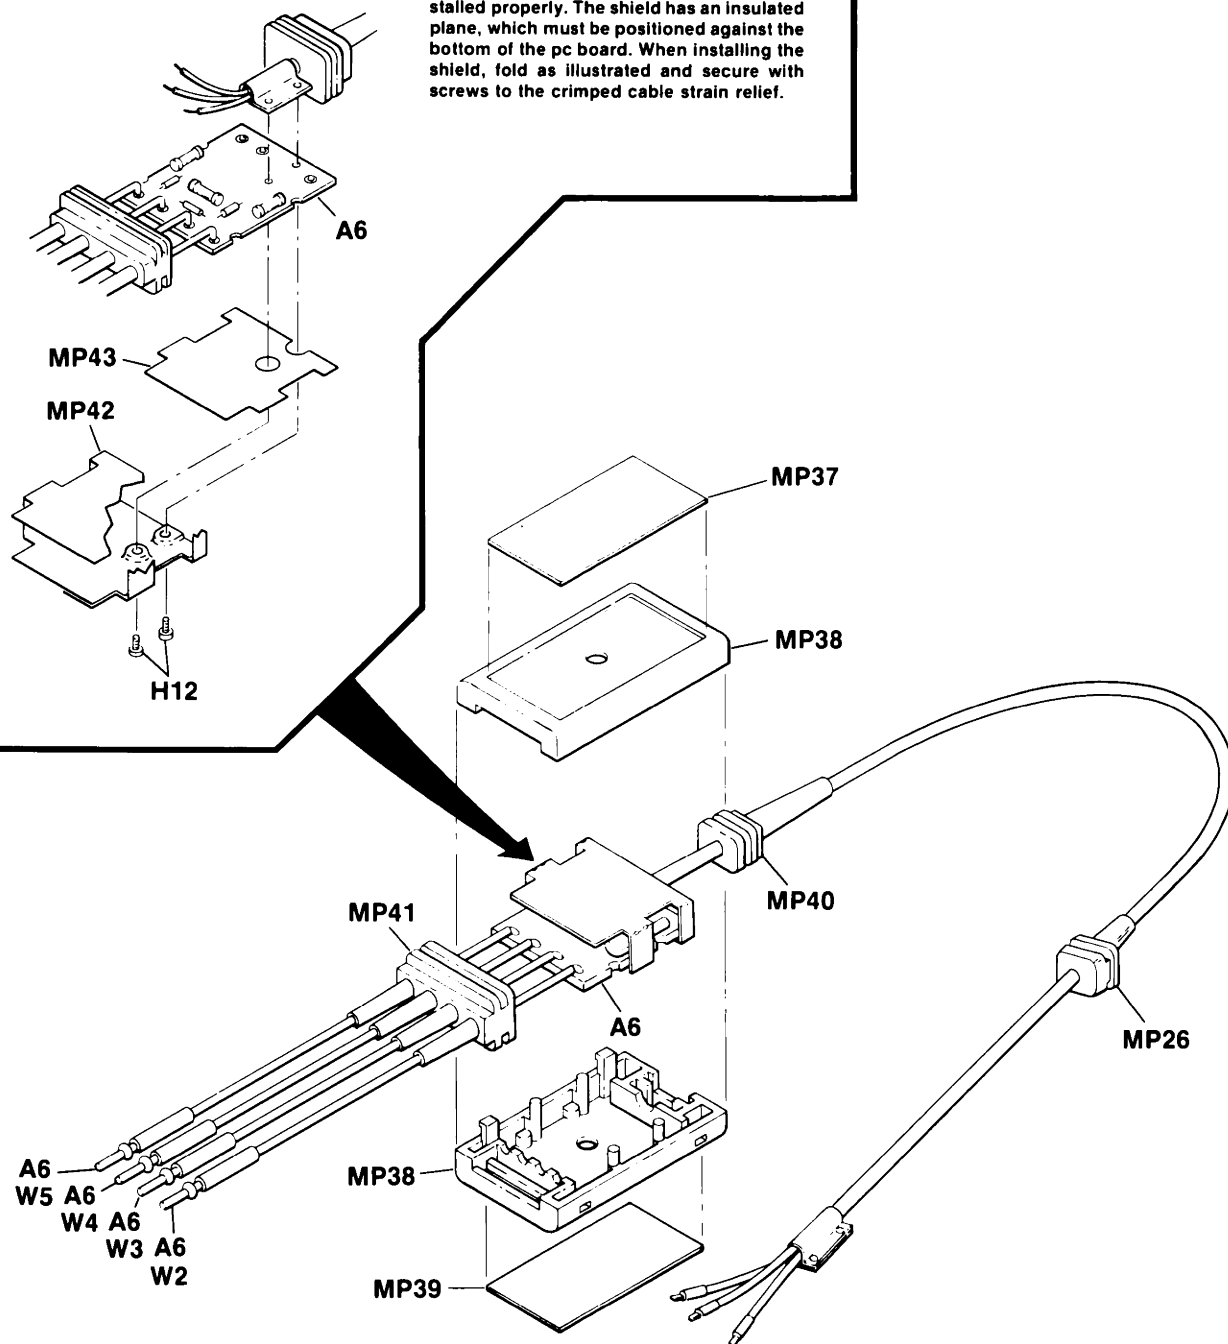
Cabinet Parts and Hardware (Timing Pod)
